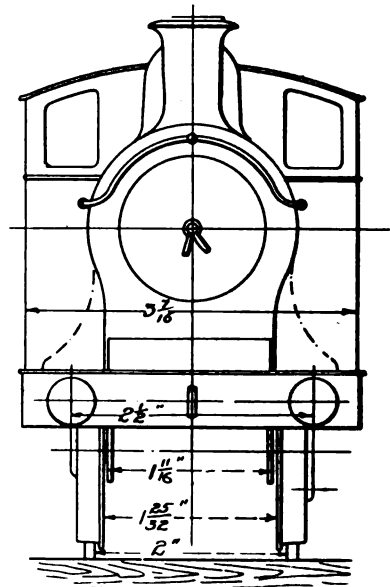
END VIEW OF MODEL SHUNTING ENGINE.
